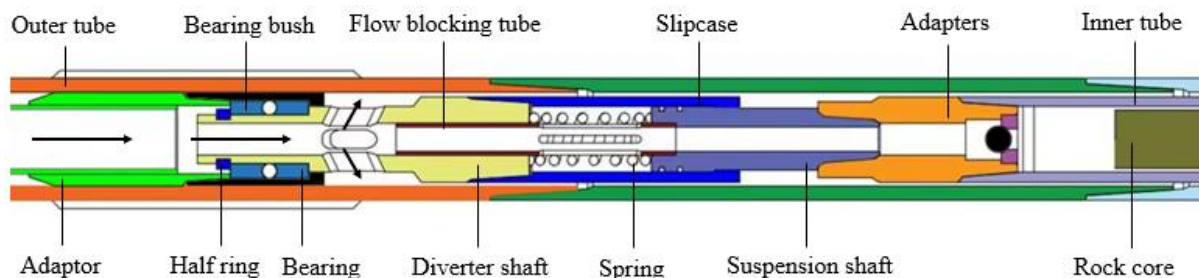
Two-dimensional cross-sectional view of the mandrel section of the coring tool
